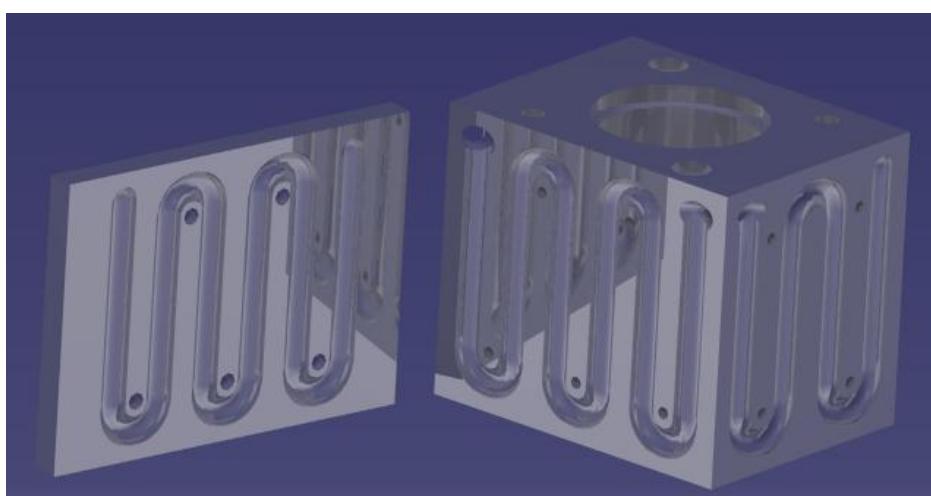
, Displaying the CAD model of cylinder with cooling pipes
